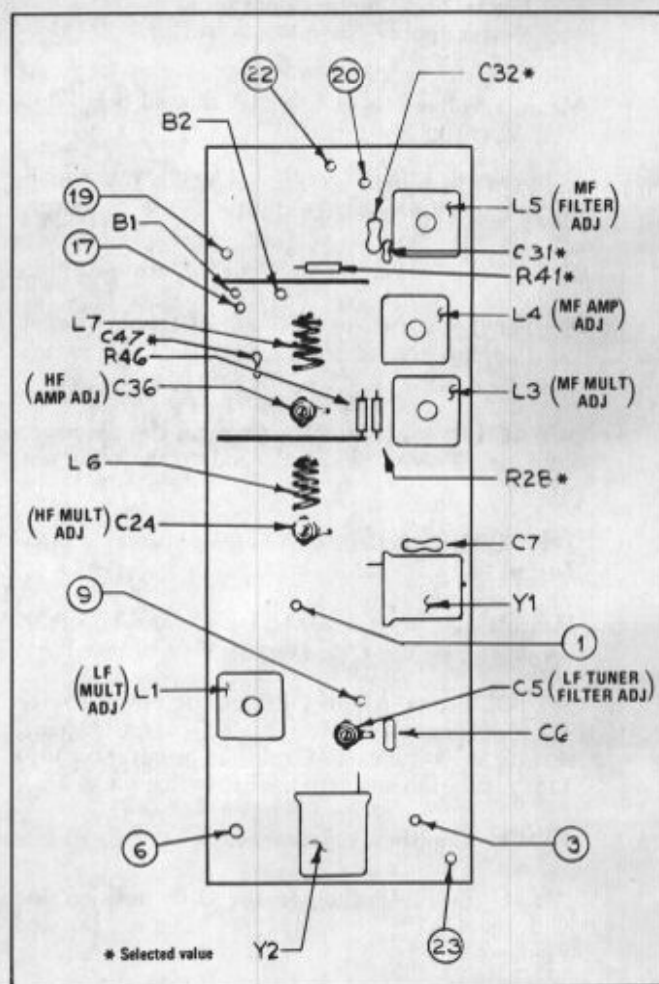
Trimmer Locations, Frequency Generator Assembly, A21
